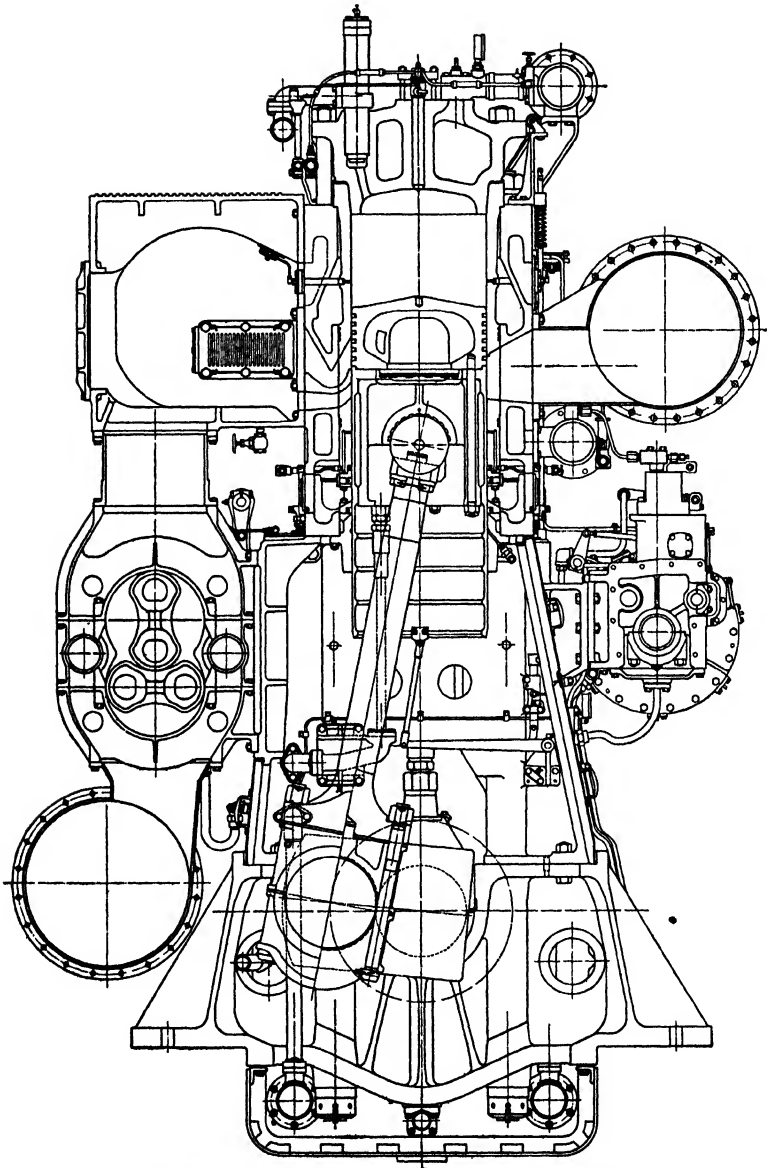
Cross-sectional elevation of Busch-Sulzer two-cycle, single-acting engine. This type of engine was used on the U.S. Maritime Commission's C-8 geared Diesel ships.
